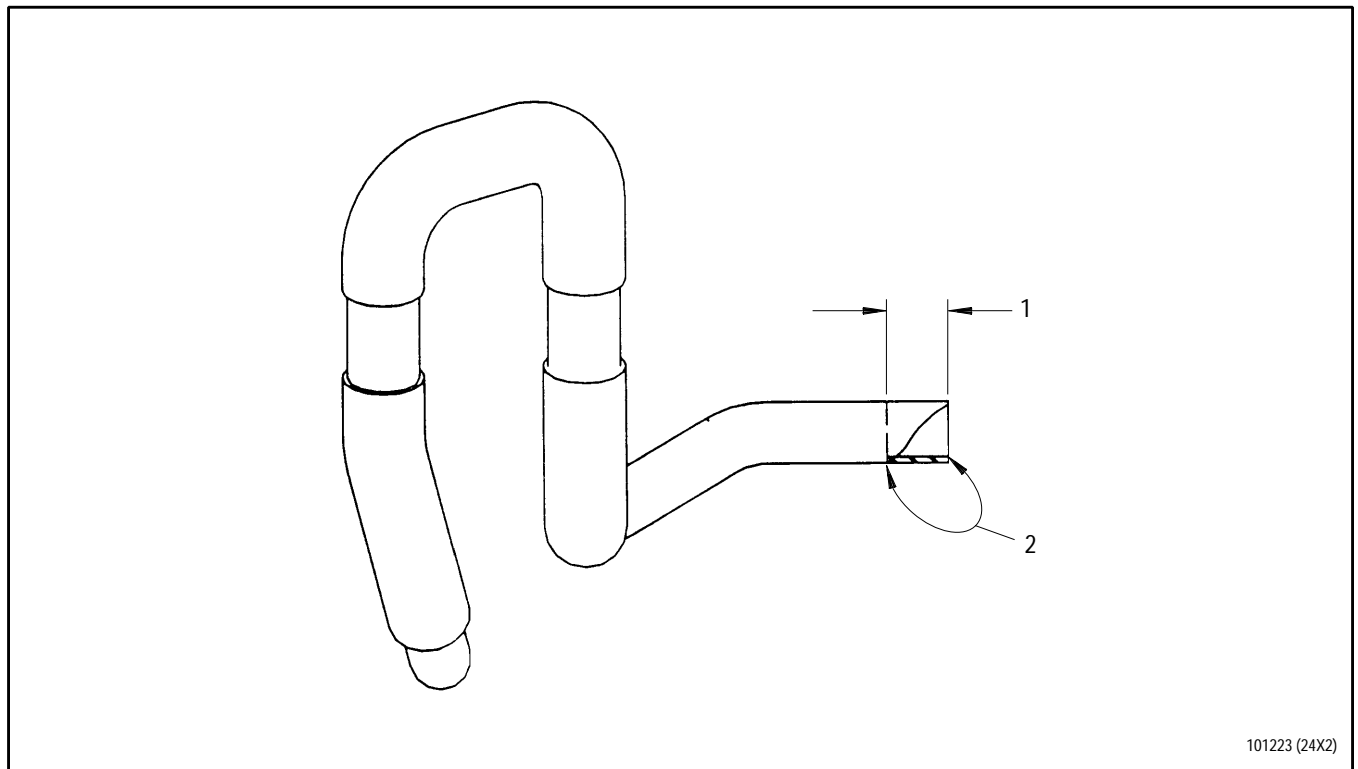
No. 4 Bearing Left Internal Scavenge Tube Assembly - Ring or Ferrule Replacement
